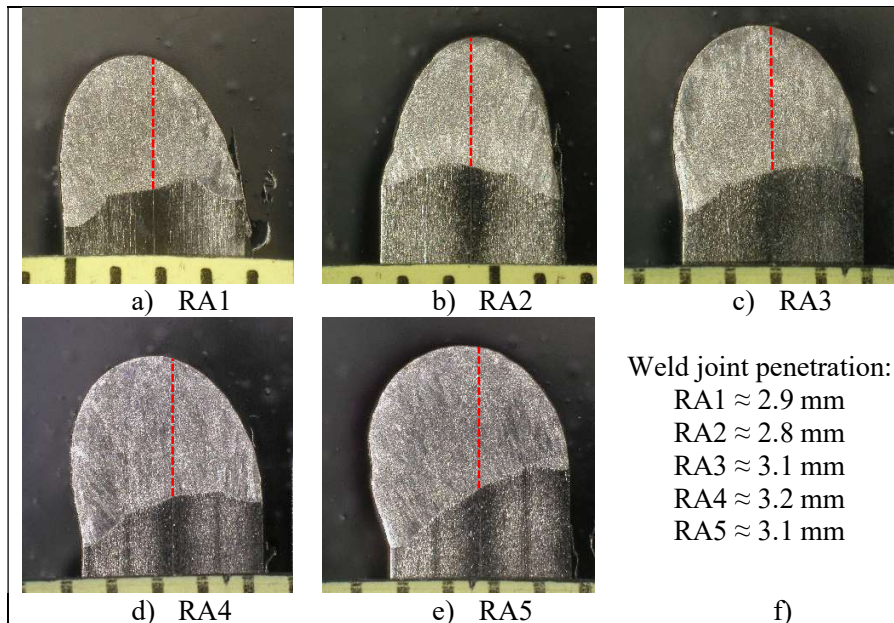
Weld cross-sections from the welded edge joint of test specimen RA. Red dashed line indicates the location from which the weld joint penetration is measured. In the scale strip, one interval corresponds to 1 mm.
